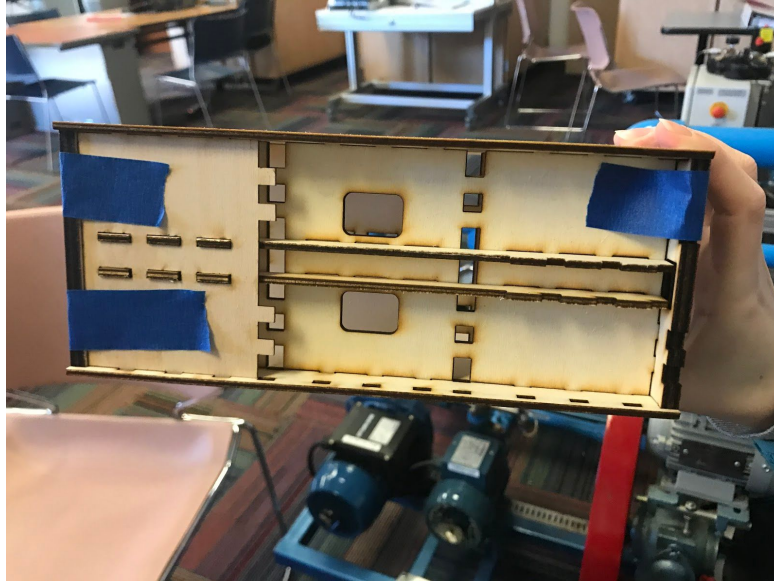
Top View of fuselage with laser cut structural components before gluing.
